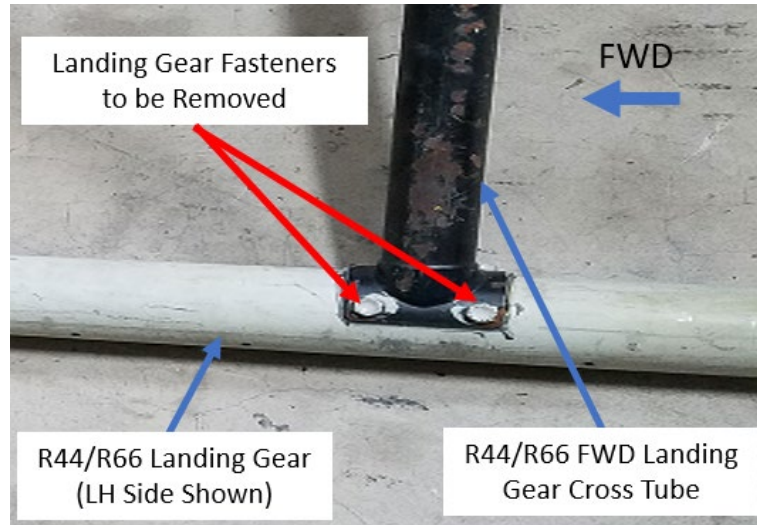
Exterior leg mounting bolts (at forward cross tube)
